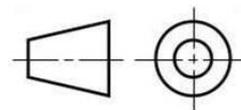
Mechanical Component with Angular and Linear Dimensions
